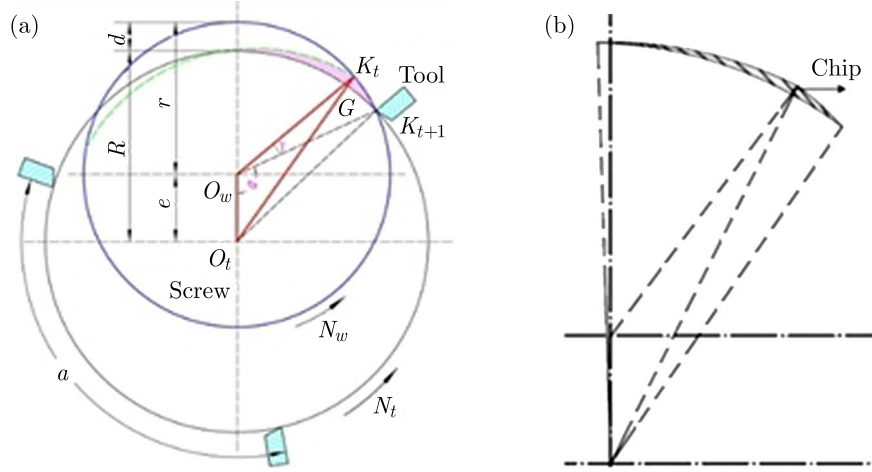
Simplified geometry model of (a) cutting principle and (b) chip of whirlwind milling
